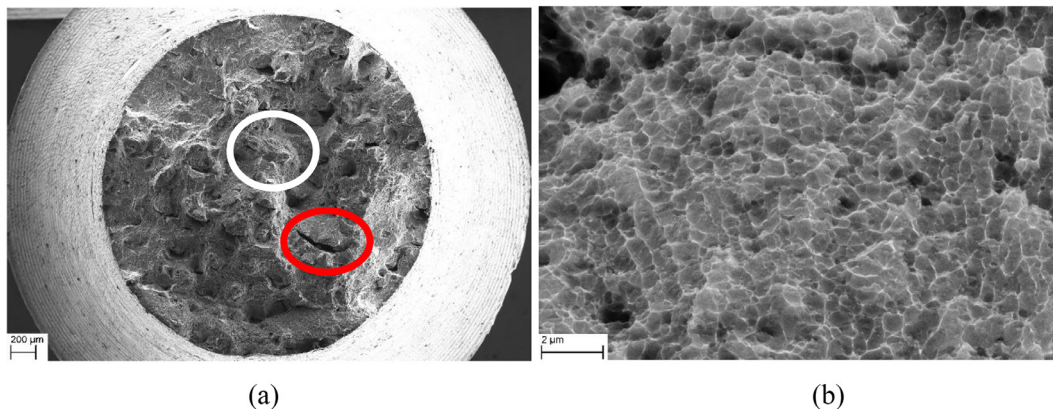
Fracture surface of a typical tensile test specimen showing (a) an overview and (b) a higher magnification from inside the white circle showing a dimpled fracture surface. A large crack is seen inside the red circle in (a). This specimen corresponds to specimen 3 in Fig. 5.
